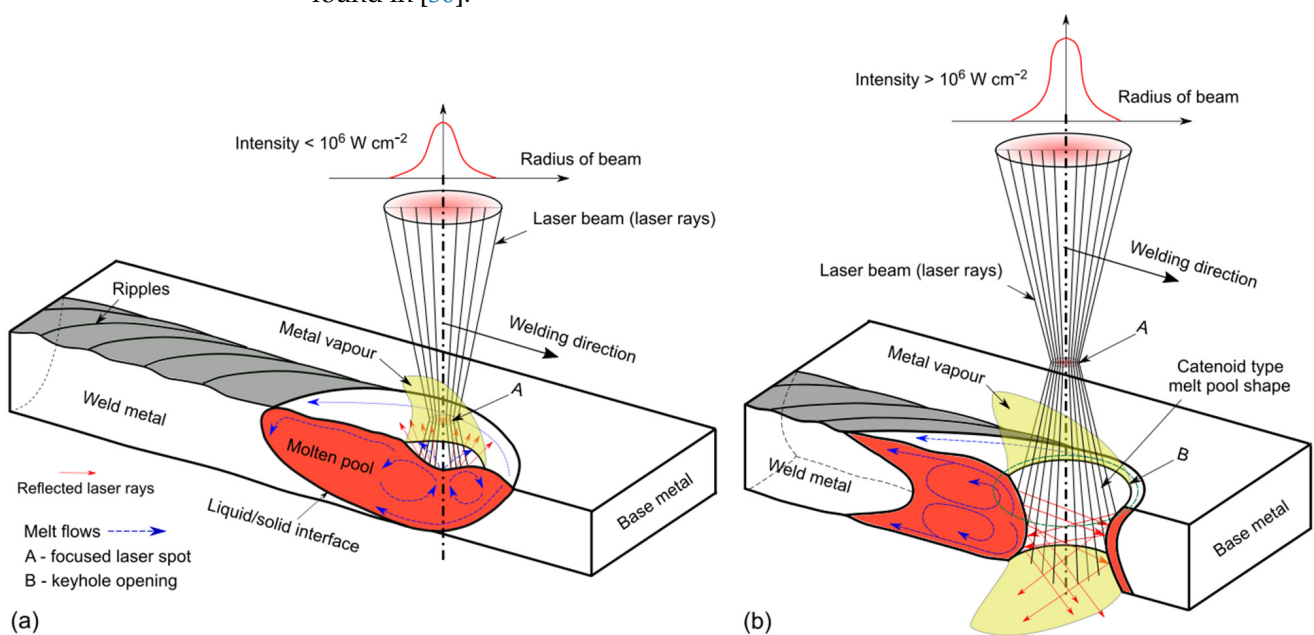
(a) Schematic illustration of laser beam physics (beam focused near surface) during heat conduction mode with melt flows based on [31,32]. (b) Schematic drawing of laser beam physics (defocused beam) during keyhole mode welding [21,22,33].
